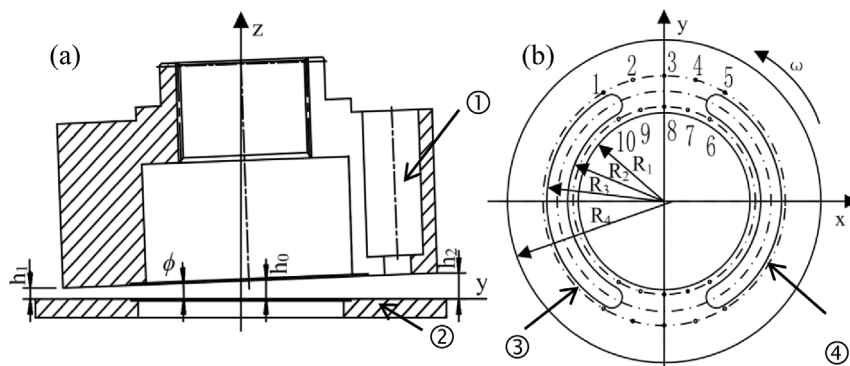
Mathematical model of valve plate pair for piston pump, (a) assembly sketch of the cylinder block and valve plate, (b) representation of the valve plate with points of temperature measurement marked. (1) cylinder block, (2) valve plate, (3) high-pressure chamber, (4) low-pressure chamber.
